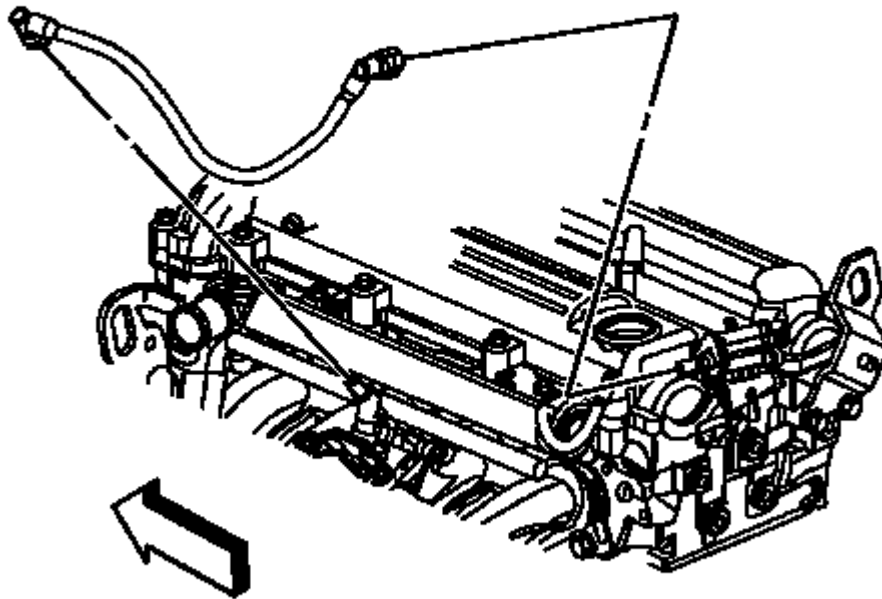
Identifying EVAP Canister Purge Solenoid Valve Tube
